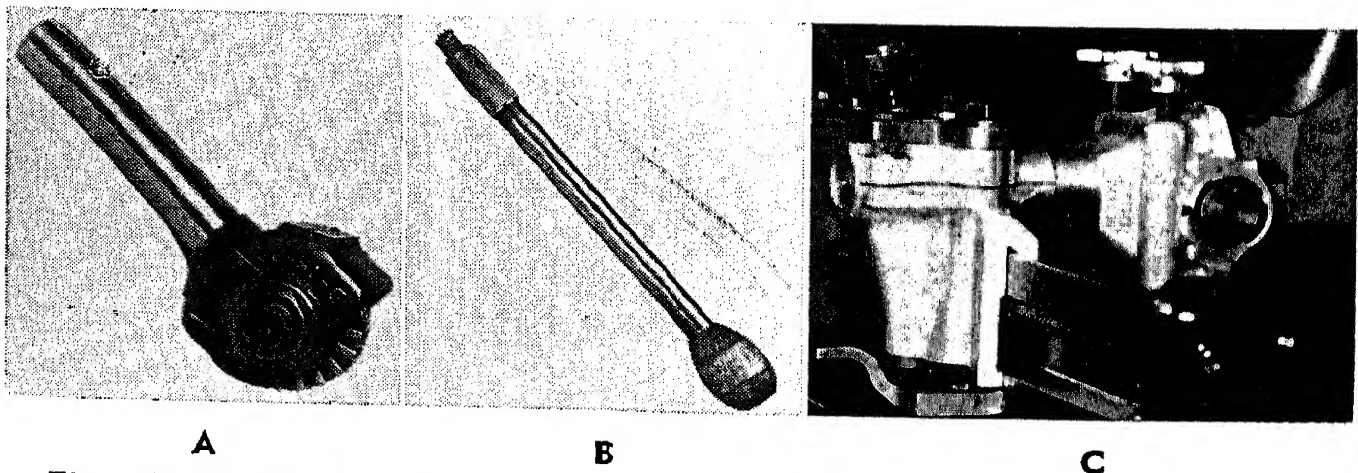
Typical wheel dressing tools. A. A steel dressing tool. (Courtesy The Ross Mfg. Co.) B. An abrasive stick dresser. (Courtesy The Carborundum Co.) C. An abrasive wheel dresser on a cylindrical grinder. (Courtesy The Ross Mfg. Co.)
